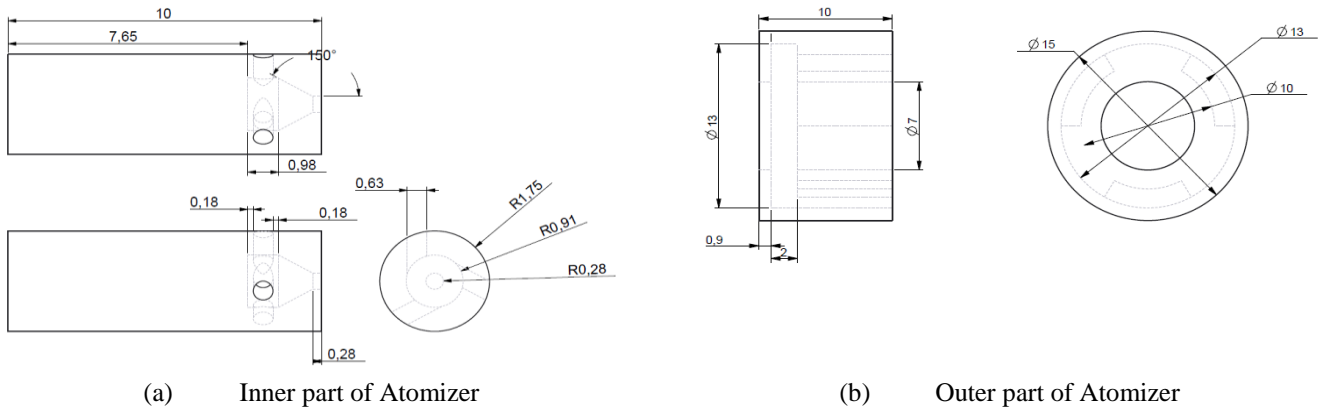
Dimensional Drawing of Pressure Swirl Atomizer (All dimensions are in mm)
